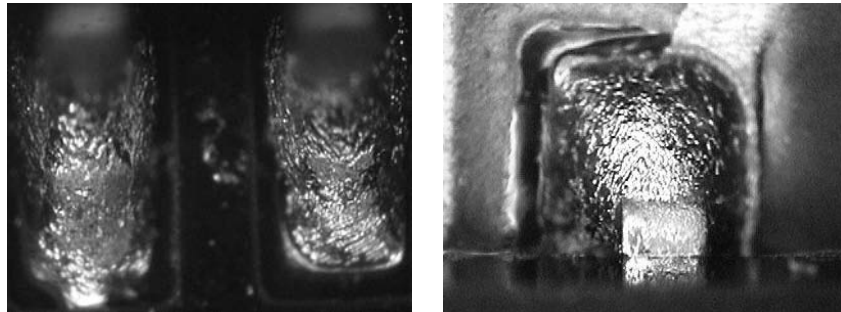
95.5Sn/3.8Ag/0.7Cu solder joints
